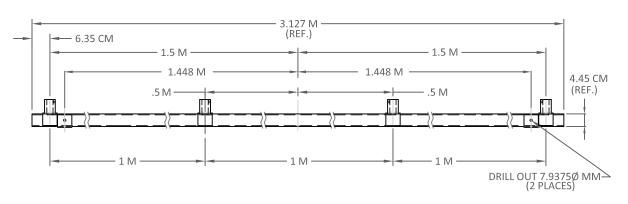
CALVERT (4) LIGHT AT 1.0M SPACING
